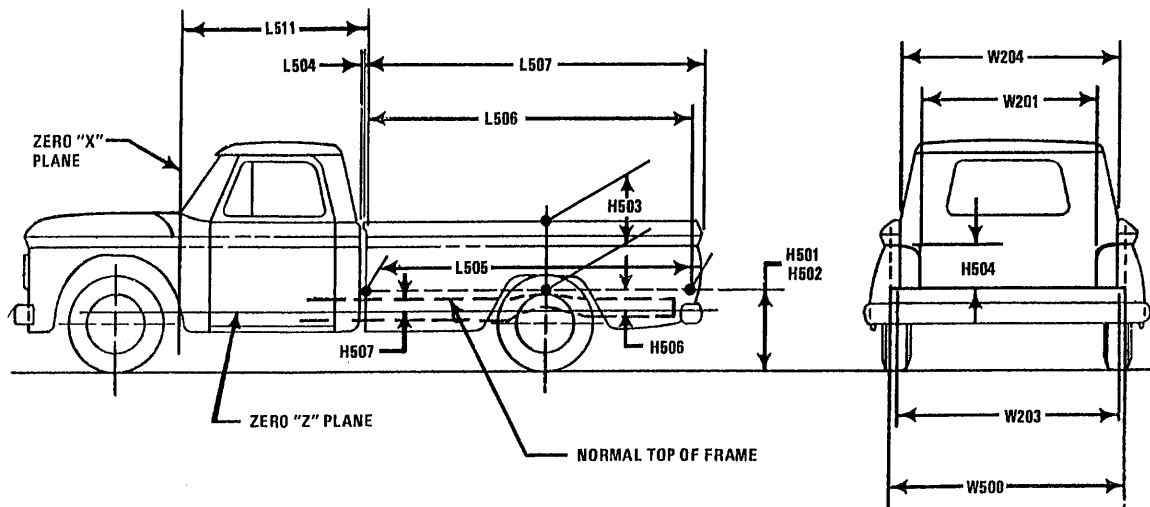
CARGO SPACE DIMENSIONS, TRUCK WITH OPEN CARGO AREA
